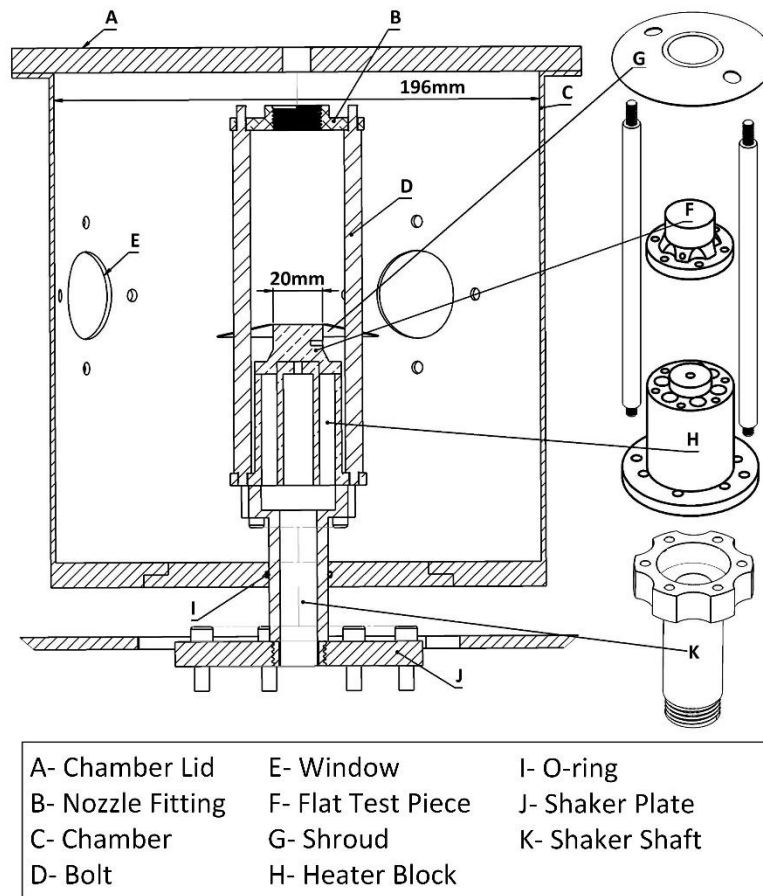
Spray chamber cross-sectional view showing exploded view of copper test piece and heater block
